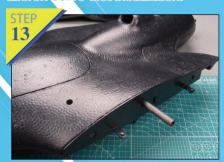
Insert the carbon fiber tube into the fuselage and fix the quick connection components by glue.
